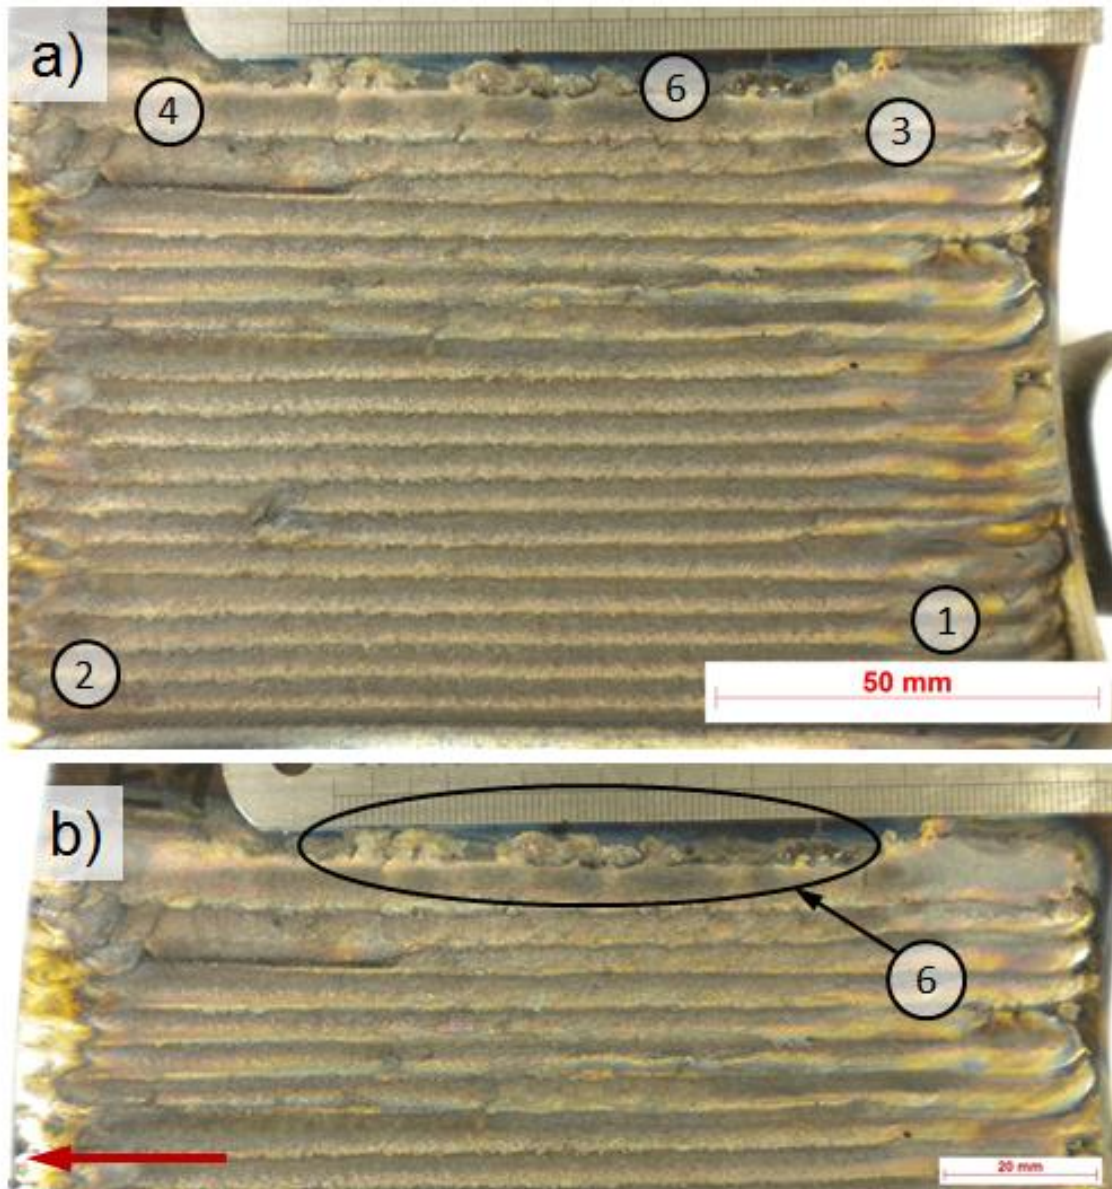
Cladding trial in overlap; a) PFR = 25 g/min; b) magnified image of a); 1: Beginning of first weld; 2: finish of first weld; 3: beginning of last weld; 4: finish of last weld; red arrow: welding direction
